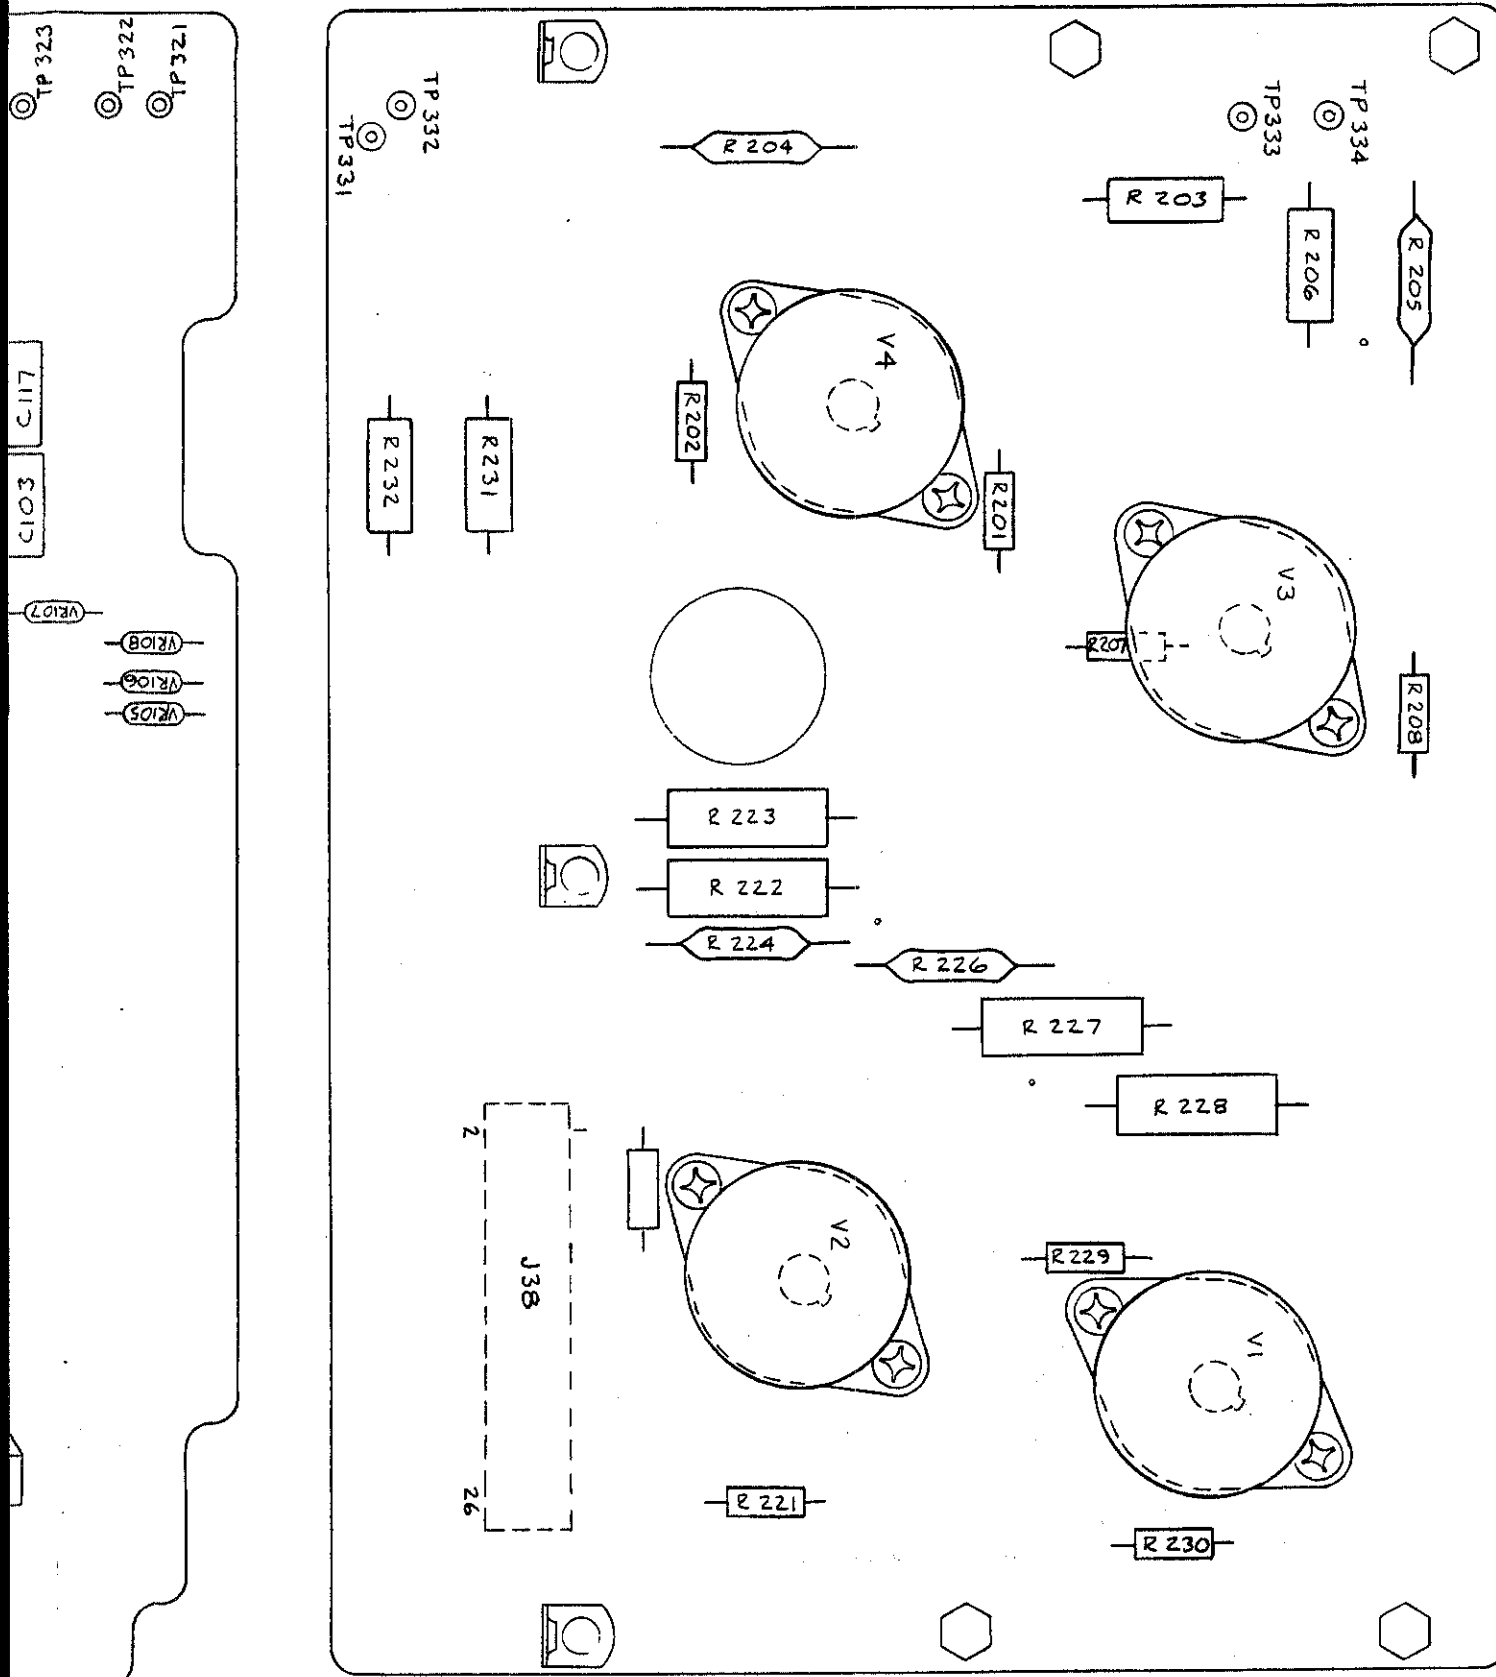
POWER AMPLIFIER LOWER TUBE ASSEMBLIES COMPONENT LOCATION
